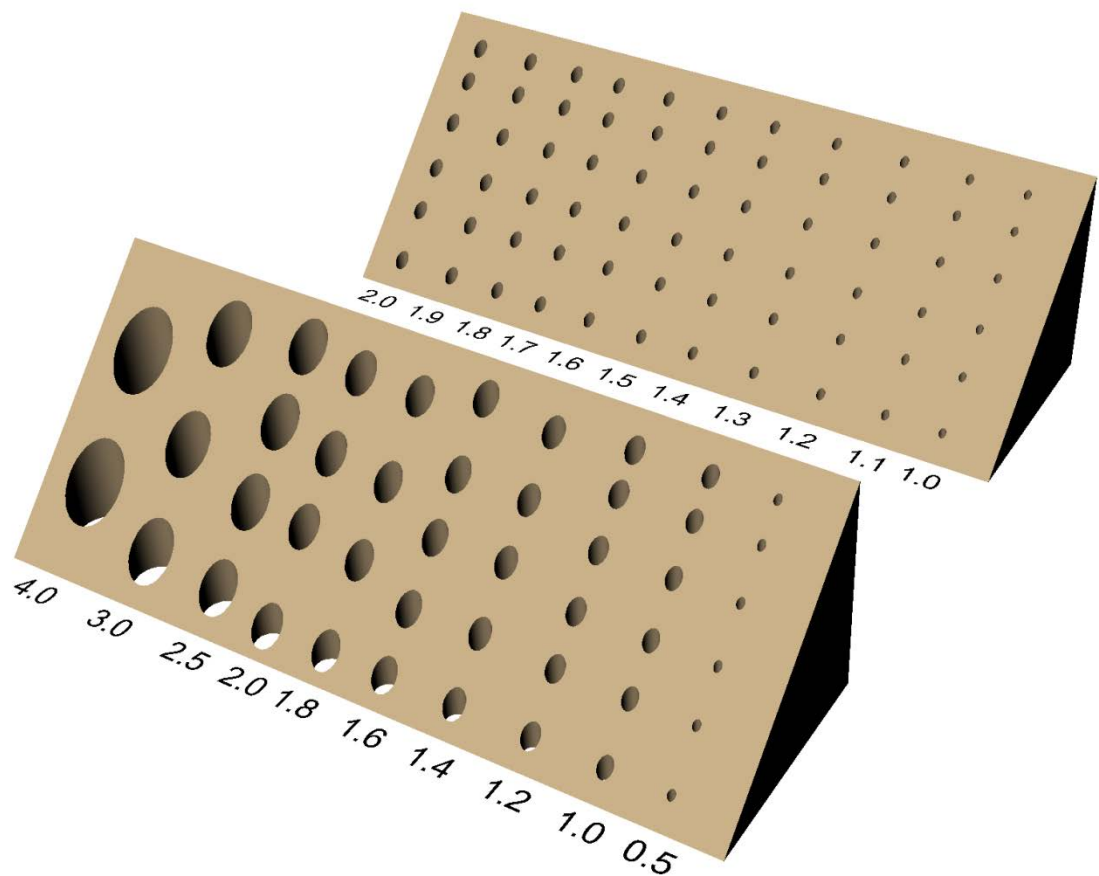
Test blocks were created in order to test the precision and accuracy of the selective laser sintering machine. Comparisons were made between the manufactured hole diameter and the nominal hole diameter (above in mm). These test parts were included in each batch. Toby
